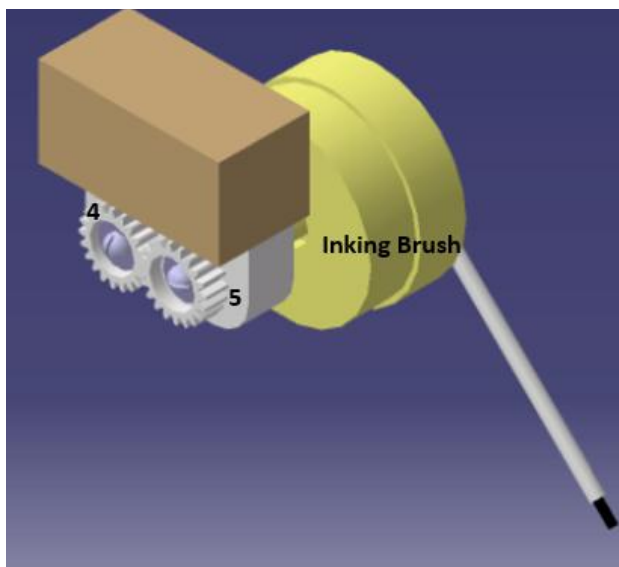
CAD Model of the gear train system developed In CATIA V5 CAD tool.
